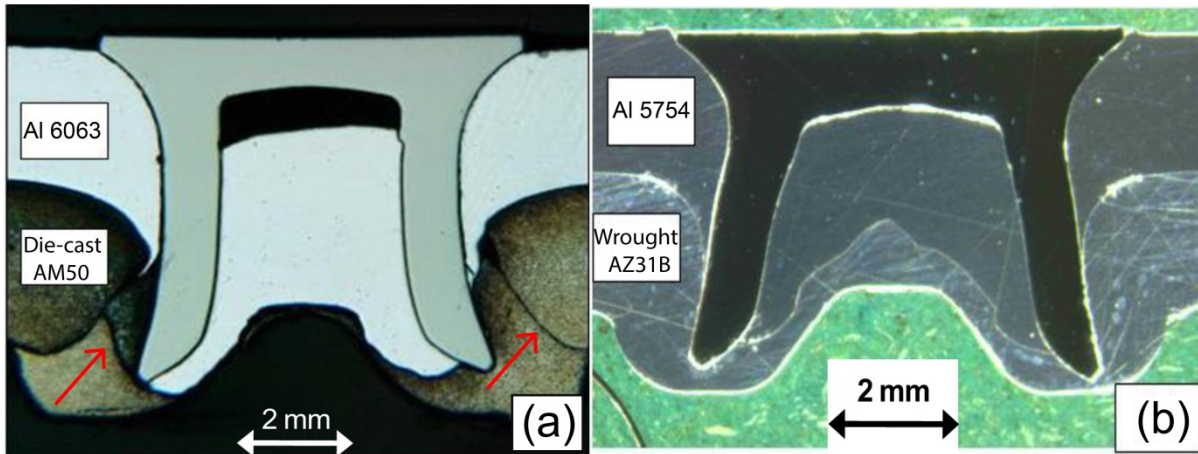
Cross-section view of (a) upper extruded aluminium alloy 6063 to lower die-cast magnesium alloy AM50 where cracking is observed on AM50 sheet after riveting and (b) upper wrought aluminium alloy 5754 to lower wrought magnesium alloy AZ31B and no crack is found [164].
